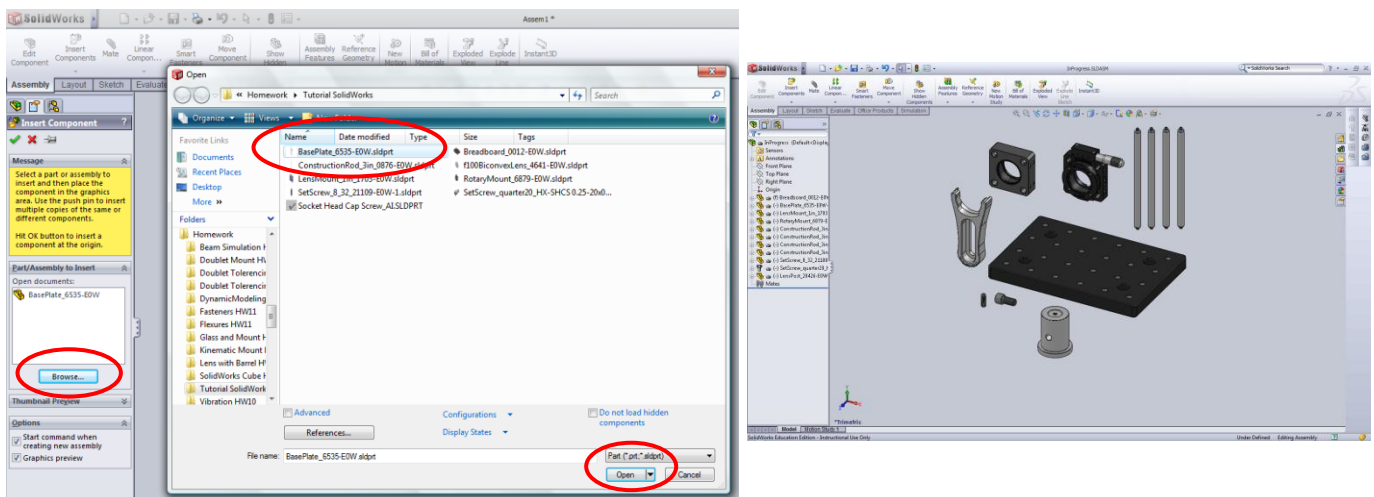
Inserting a component into the assembly file and an illustration of all parts of the assembly.
